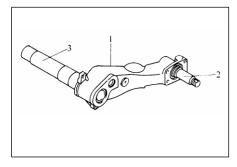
Rear Rocker arm Assembly 1- Rear rocker 2- Axle 3- Axle tube
